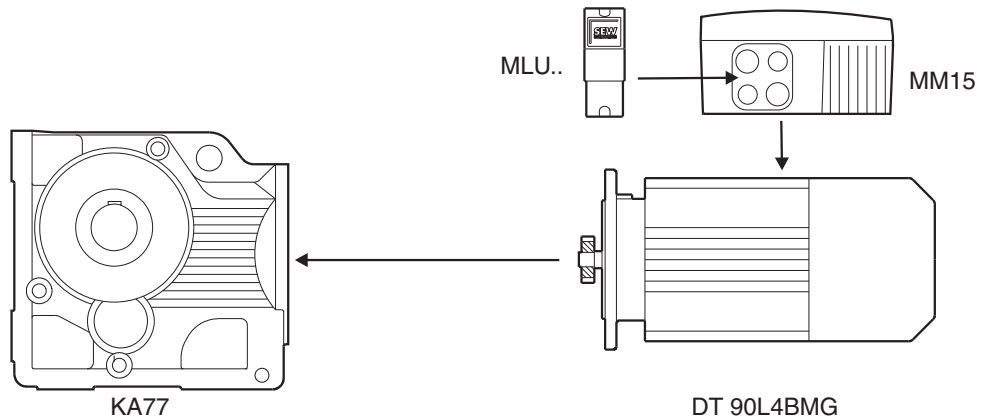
Example for the unit designation of a MOVIMOT® gearmotor
